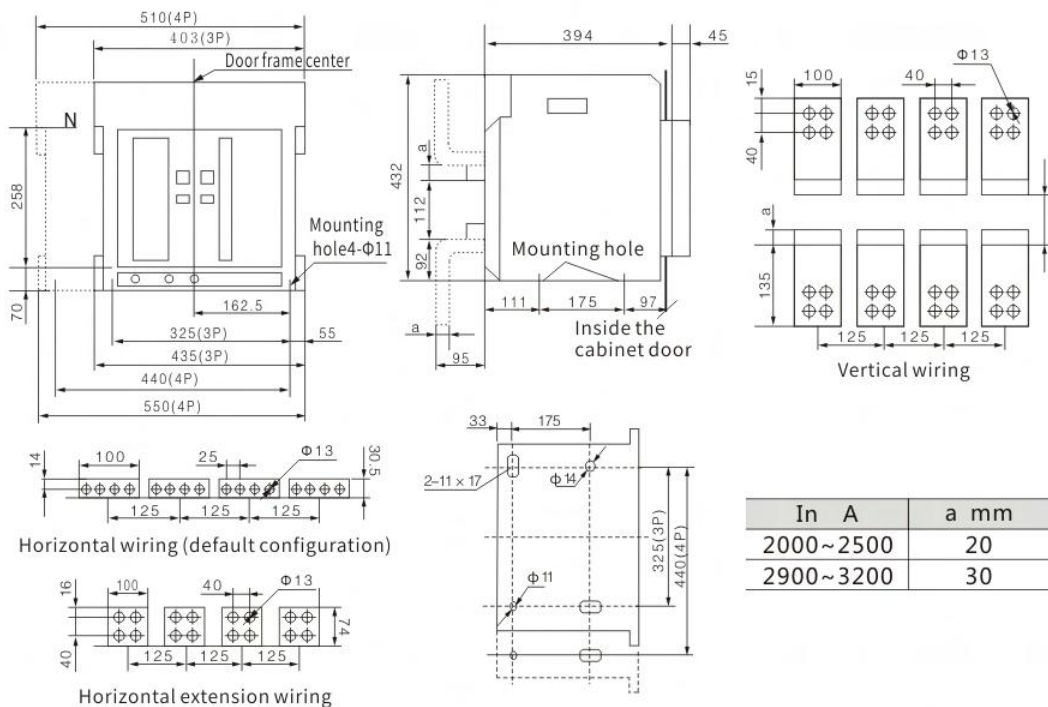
Outline and installation dimension of the draw-out type circuit breaker (JUW1 1-3200, 3200/4)
